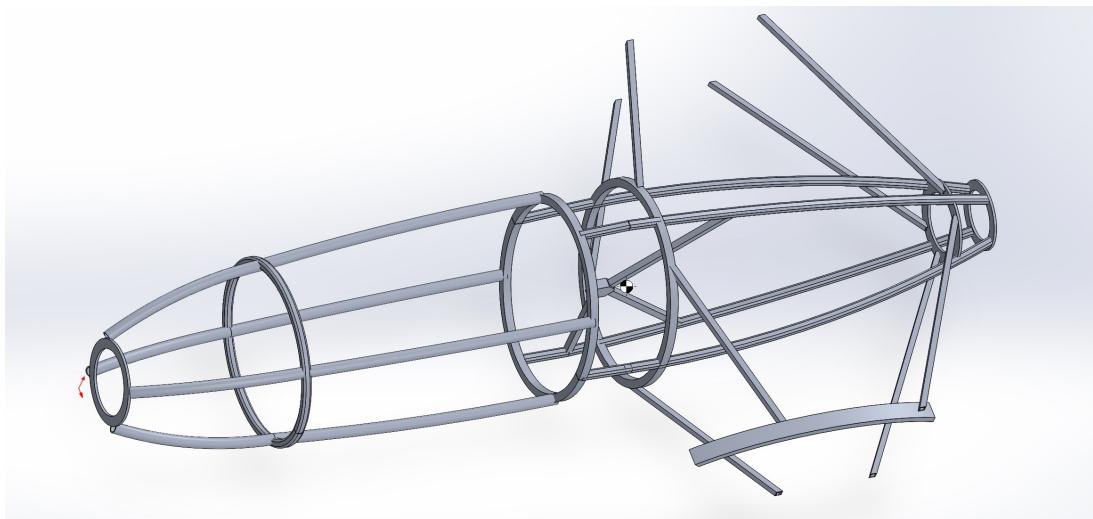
Design of the Frame. Frame is consisting of five ellipses connected with several straight tubes. In the back the tubes are connected to the outriggers.
